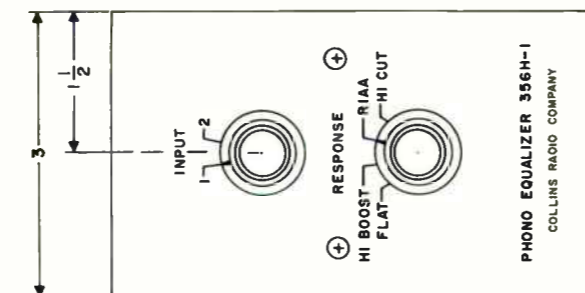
356H-1 Phono Equalizer, Outline and Mounting Dimensions
